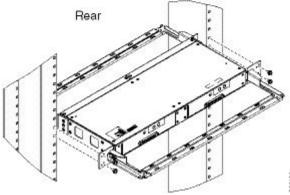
Attaching 23-inch Brackets to Patch Panel - Single
